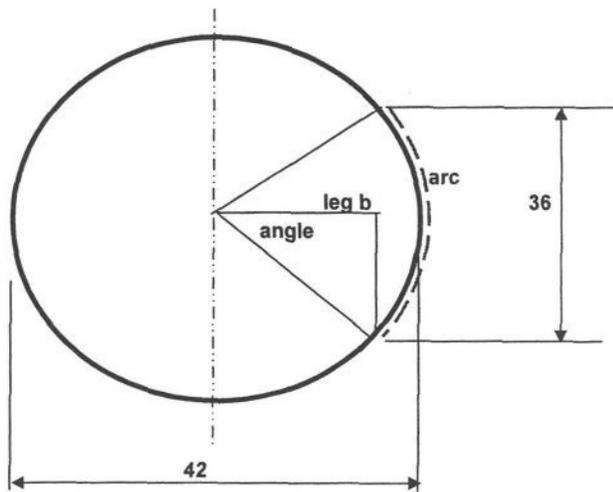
PLAN VIEW AT BREECHING IN SHELL
